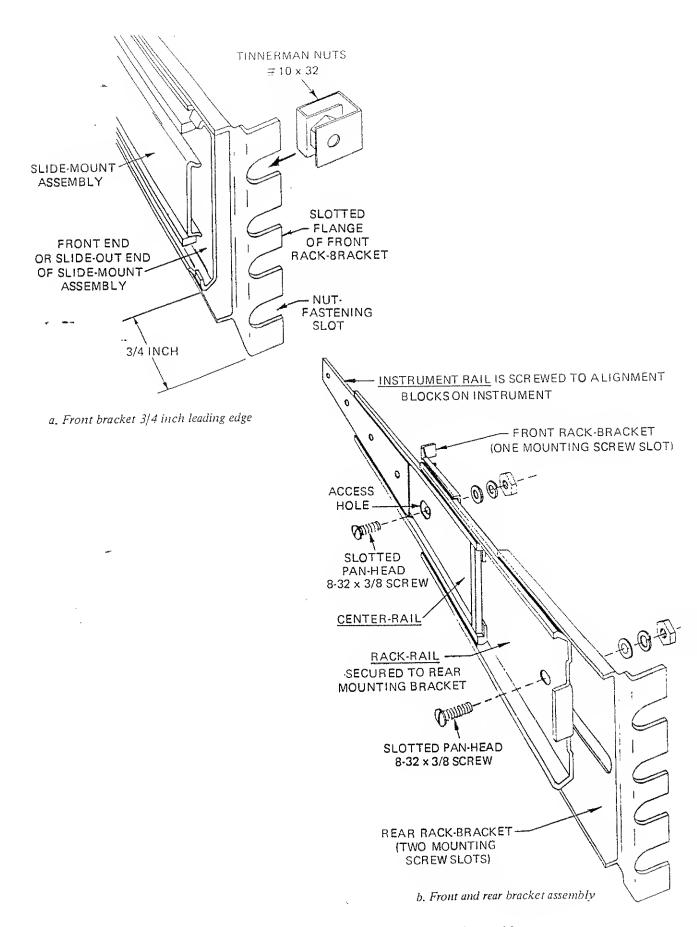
A/B-Slide-Mount and Bracket Assembly
